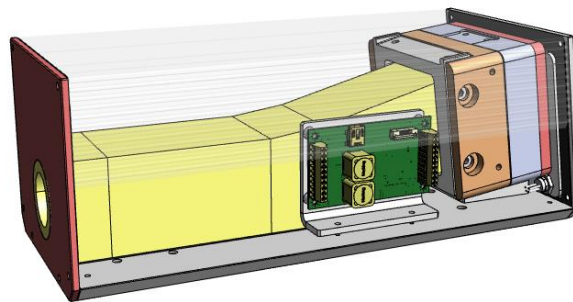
Technical drawing of the SWIR hyperspectral system, comprehensive of prism and Peltier cooling part.
